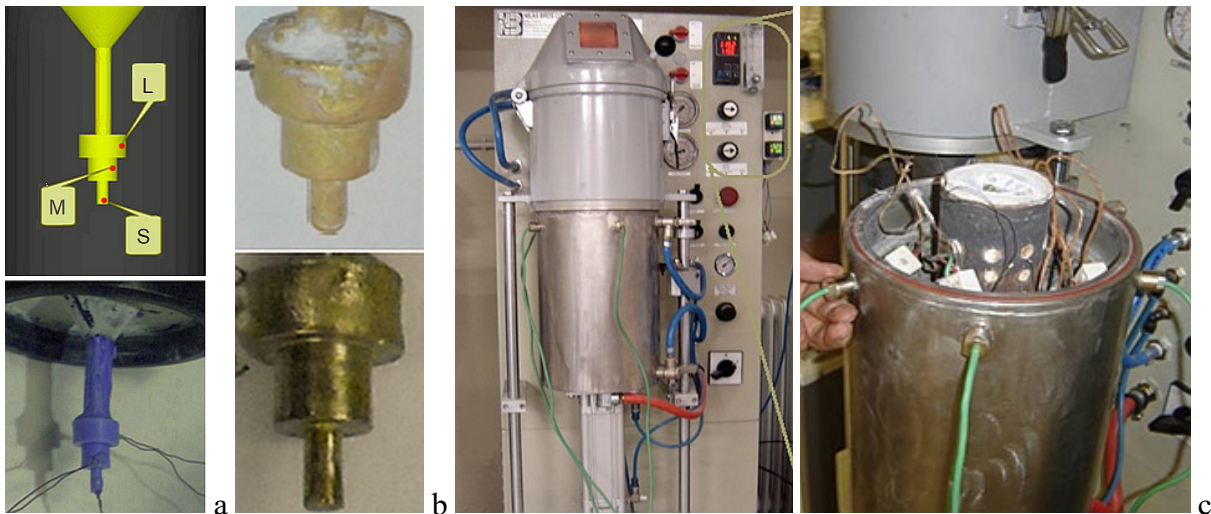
Experiment setup (a) part/feeder: design (up), wax model with thermocouples (down) (b) casting: rough (up), cleaned (down). (c) casting machine: open with flask (left), closed (right)
